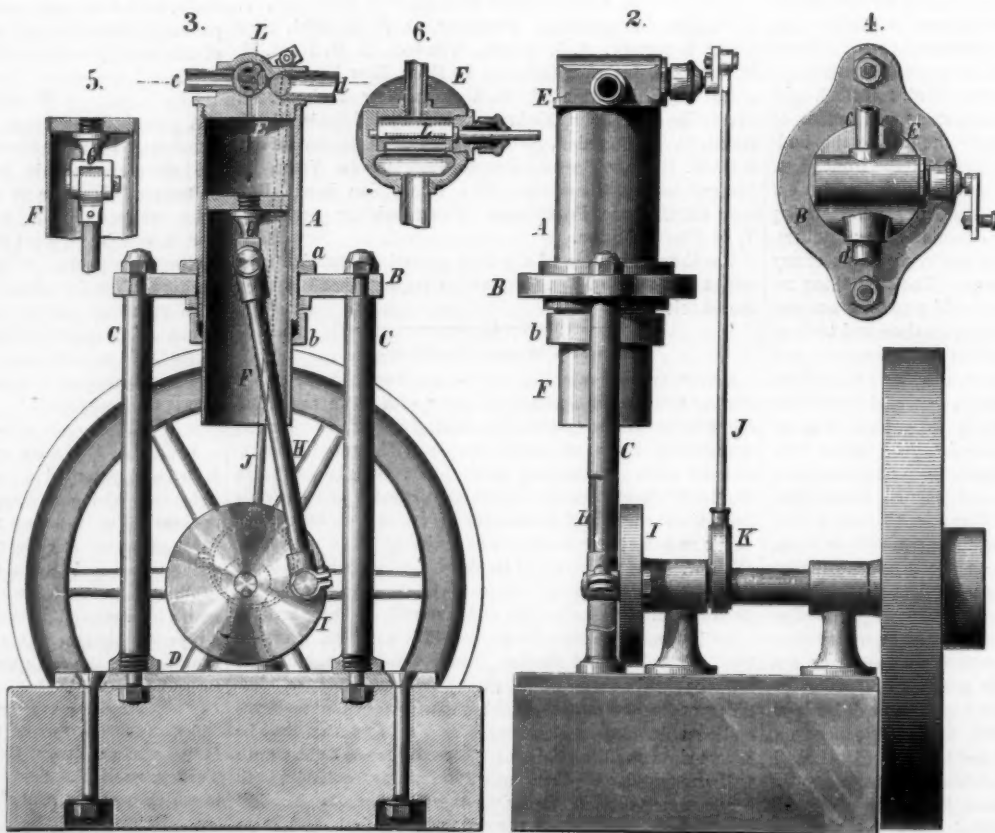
SIMPLE SINGLE-ACTING STEAM ENGINE.
